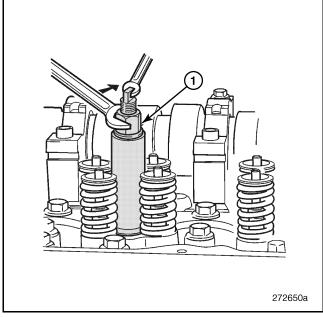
Flaring Copper Sleeve Using Installation Tool
